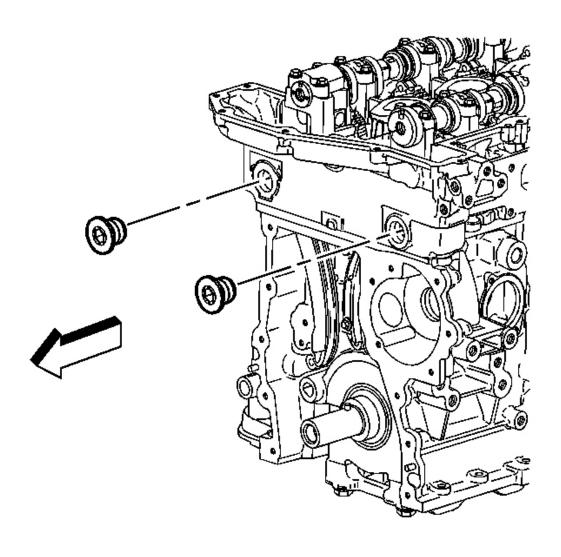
View Of Cylinder Head Access Hole Plugs Courtesy of GENERAL MOTORS CORP.
